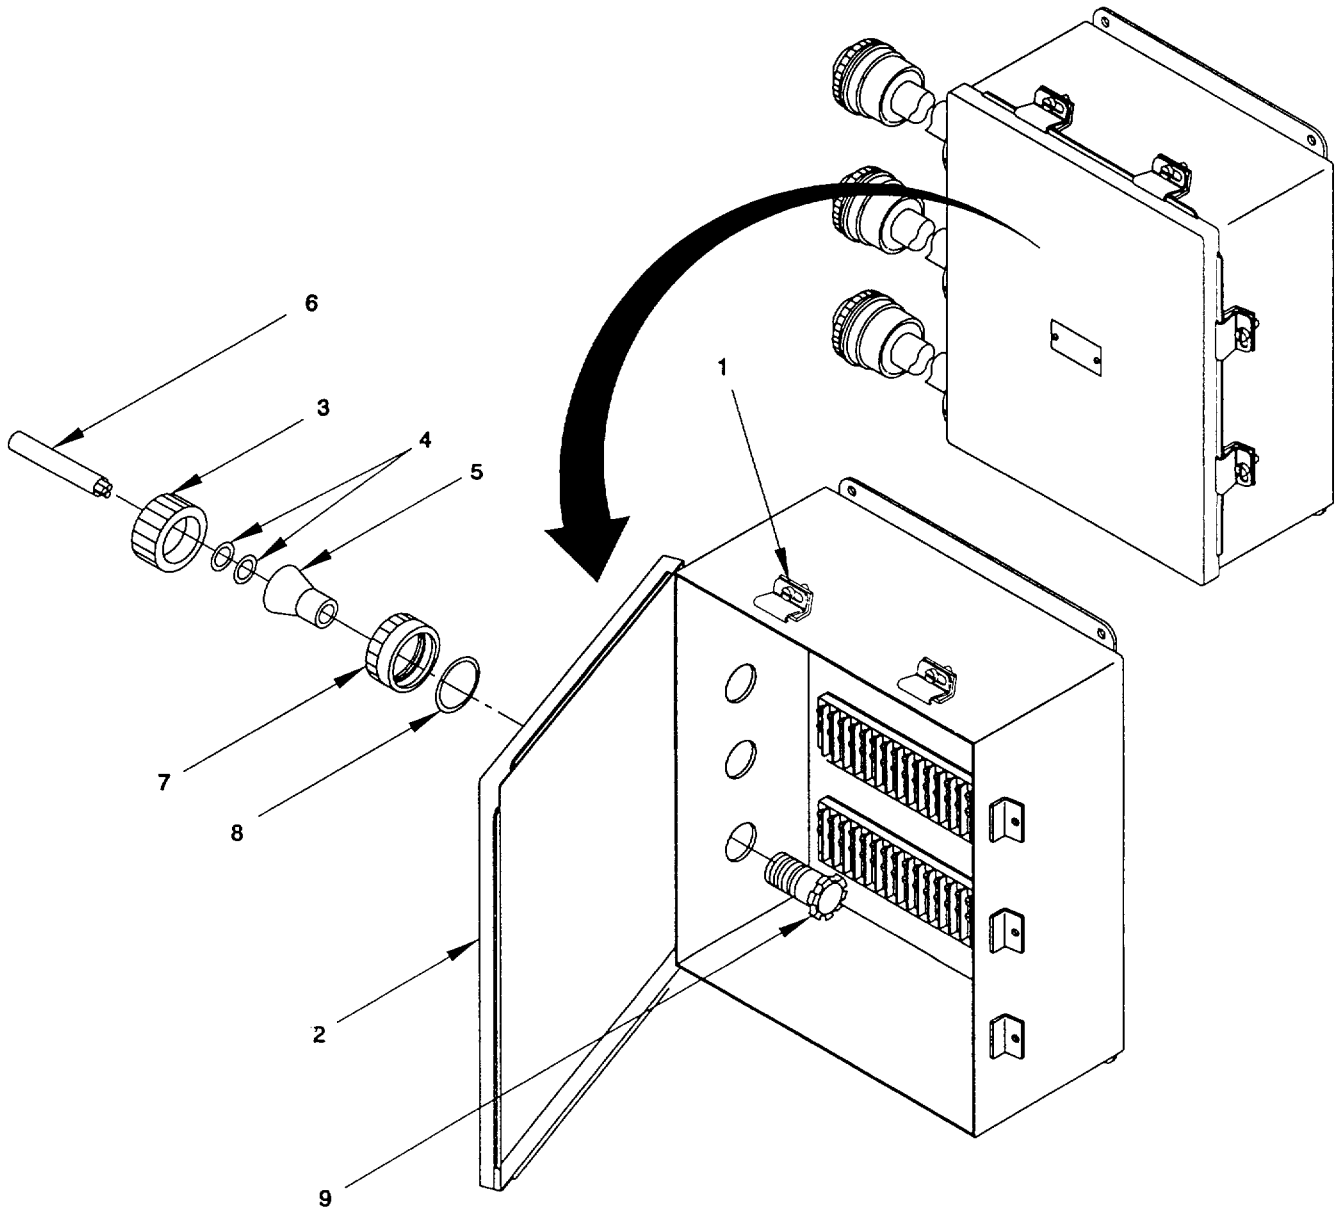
Cable Assembly, Power Module Junction Box "A3", Remove/Install.
